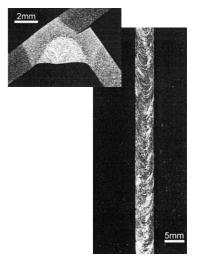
An MX-100T (1.2mmØ) weld made on a 2-mm thick fillet joint in vertical downward weld-ing with an 80 amp current.
